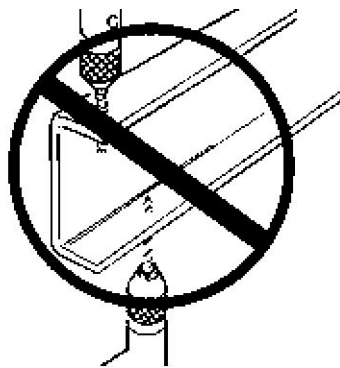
Frame Rail Flange Drilling Prohibited
